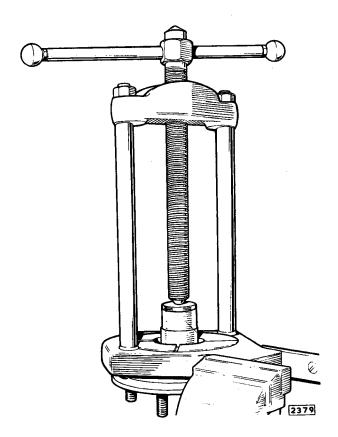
Removing the inner race from the hub using Churchill Tool No. J.16B with multi-purpose hand press Churchill Tool No. SL.14.
